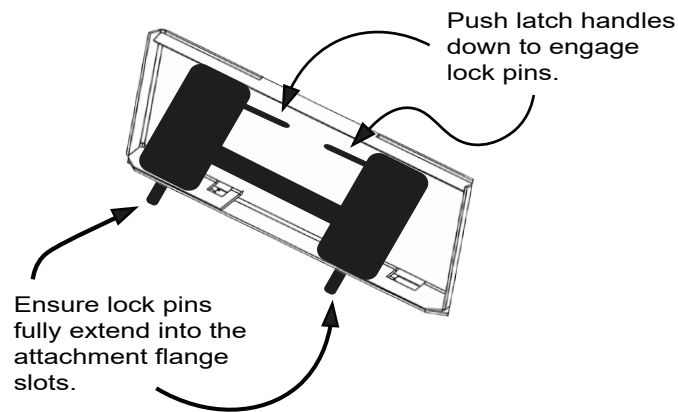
B QUICK ATTACH COUPLER LOCKED TO ATTACHMENT BRACKET
